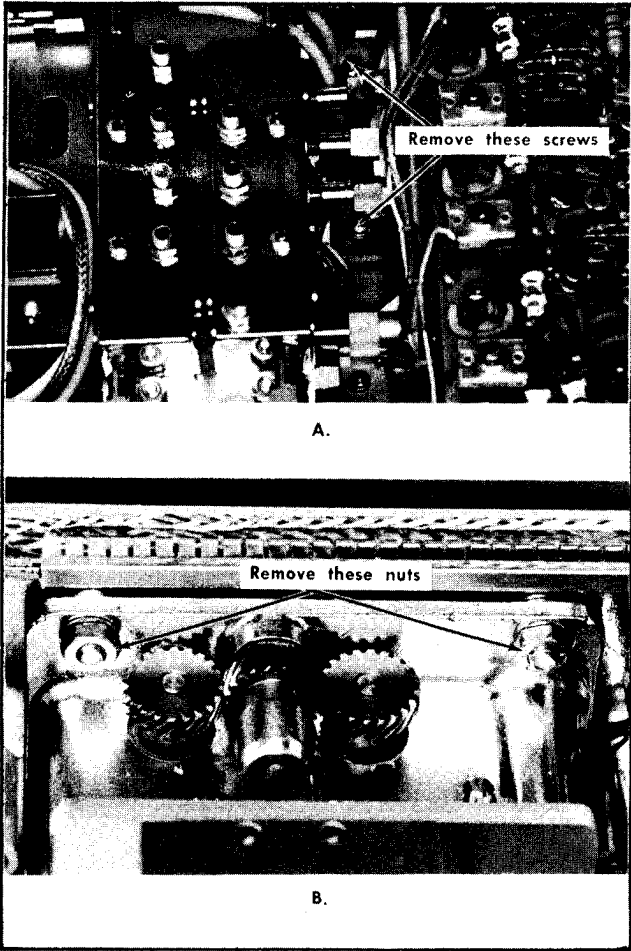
Preparation to remove the oscillator and tuner assembly.
